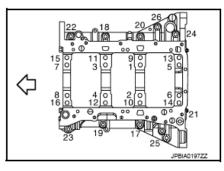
Identifying Lower Cylinder Block Bolts With Tightening Sequence Courtesy of NISSAN NORTH AMERICA, INC.
